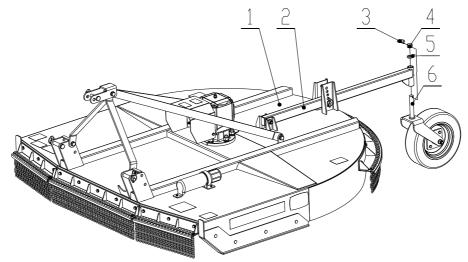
Installing Wheel Tire Assembly and Fittings
